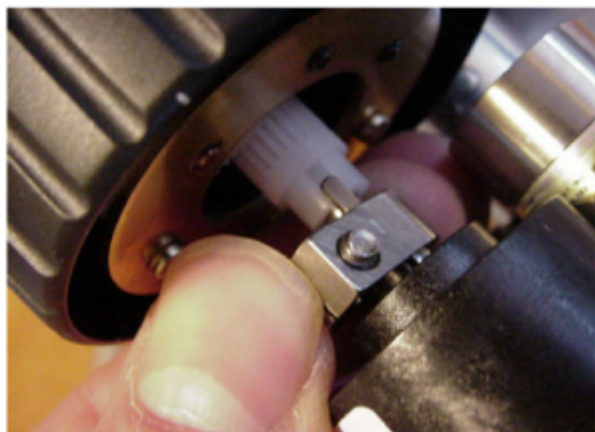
Metal tab on drive shaft clamp slides into slot on plastic gear
